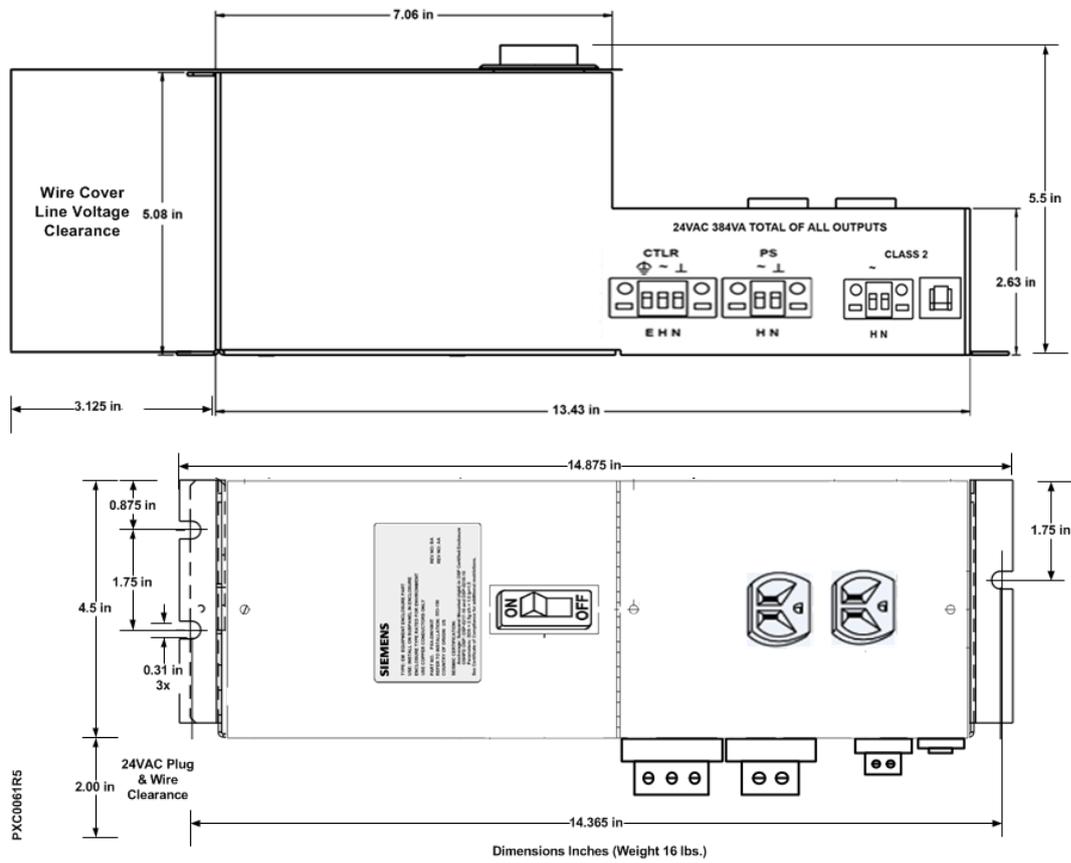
, PX Series 384VA Service Box Mounting Dimensions
